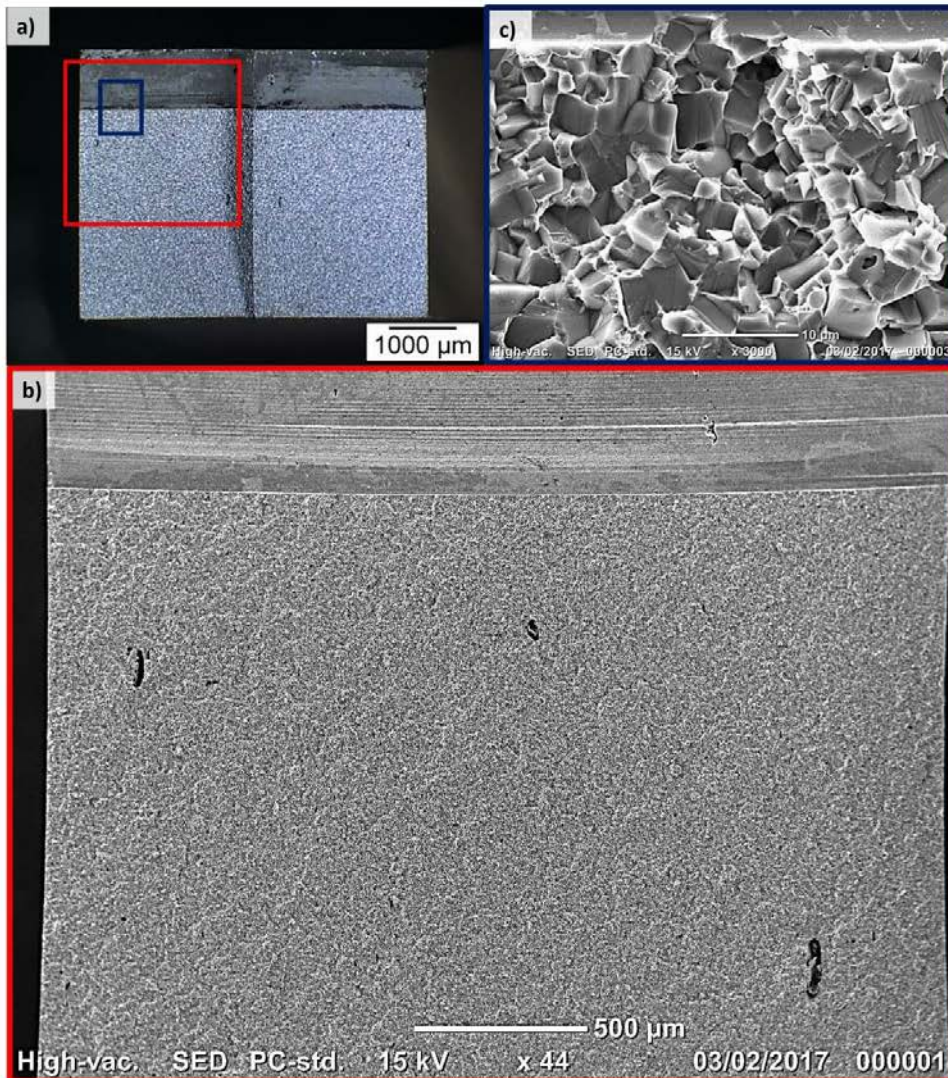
Fracture surface of a notched SDP 15FeNi cermet specimen fractured in 4-point bending (a) Macroscopic view (b) SEM micrograph of fracture morphology of sintered SDP 15FeNi cermet and (c) Zoom of fracture surface
